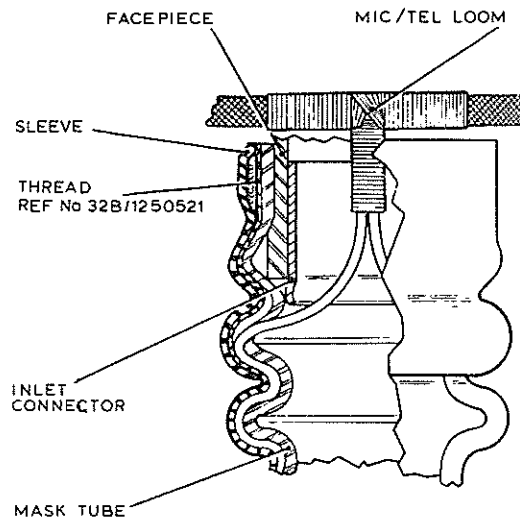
Mask tube attachment - Types P4 and Q4 masks
